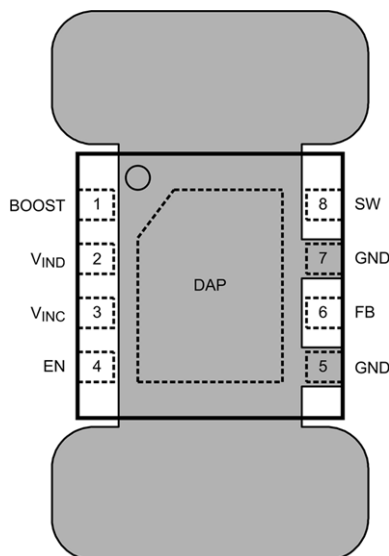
8-Lead WSON PCB Dog Bone Layout
